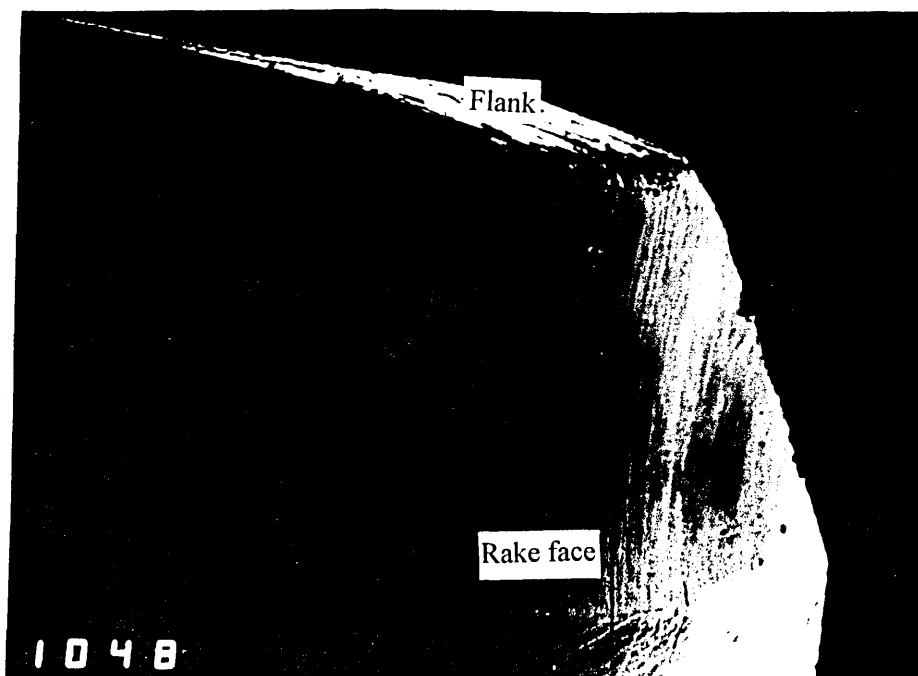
(c) Crater wear produced on the cutting edge of the roughing tooth of the TiN coated A2 segments when cutting mild steel
